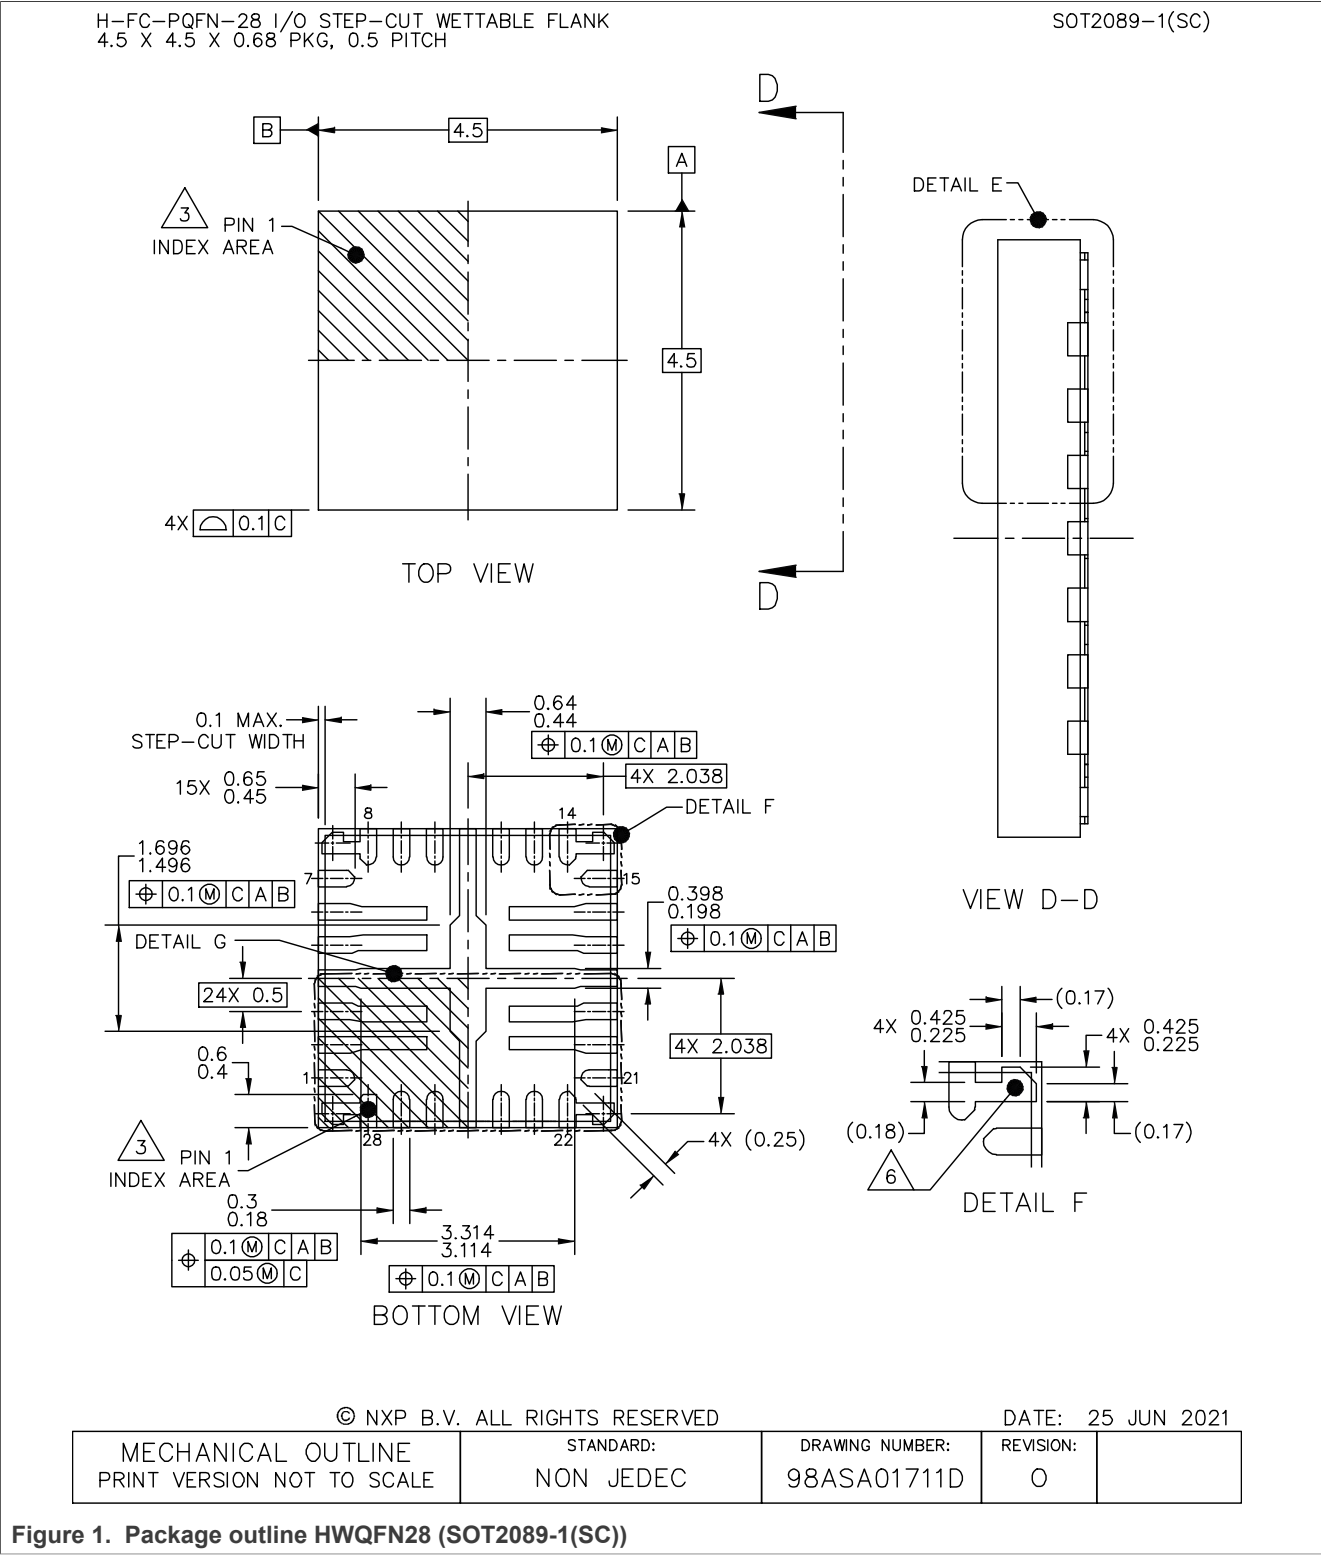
Package outline HWQFN28 (SOT2089-1(SC))
